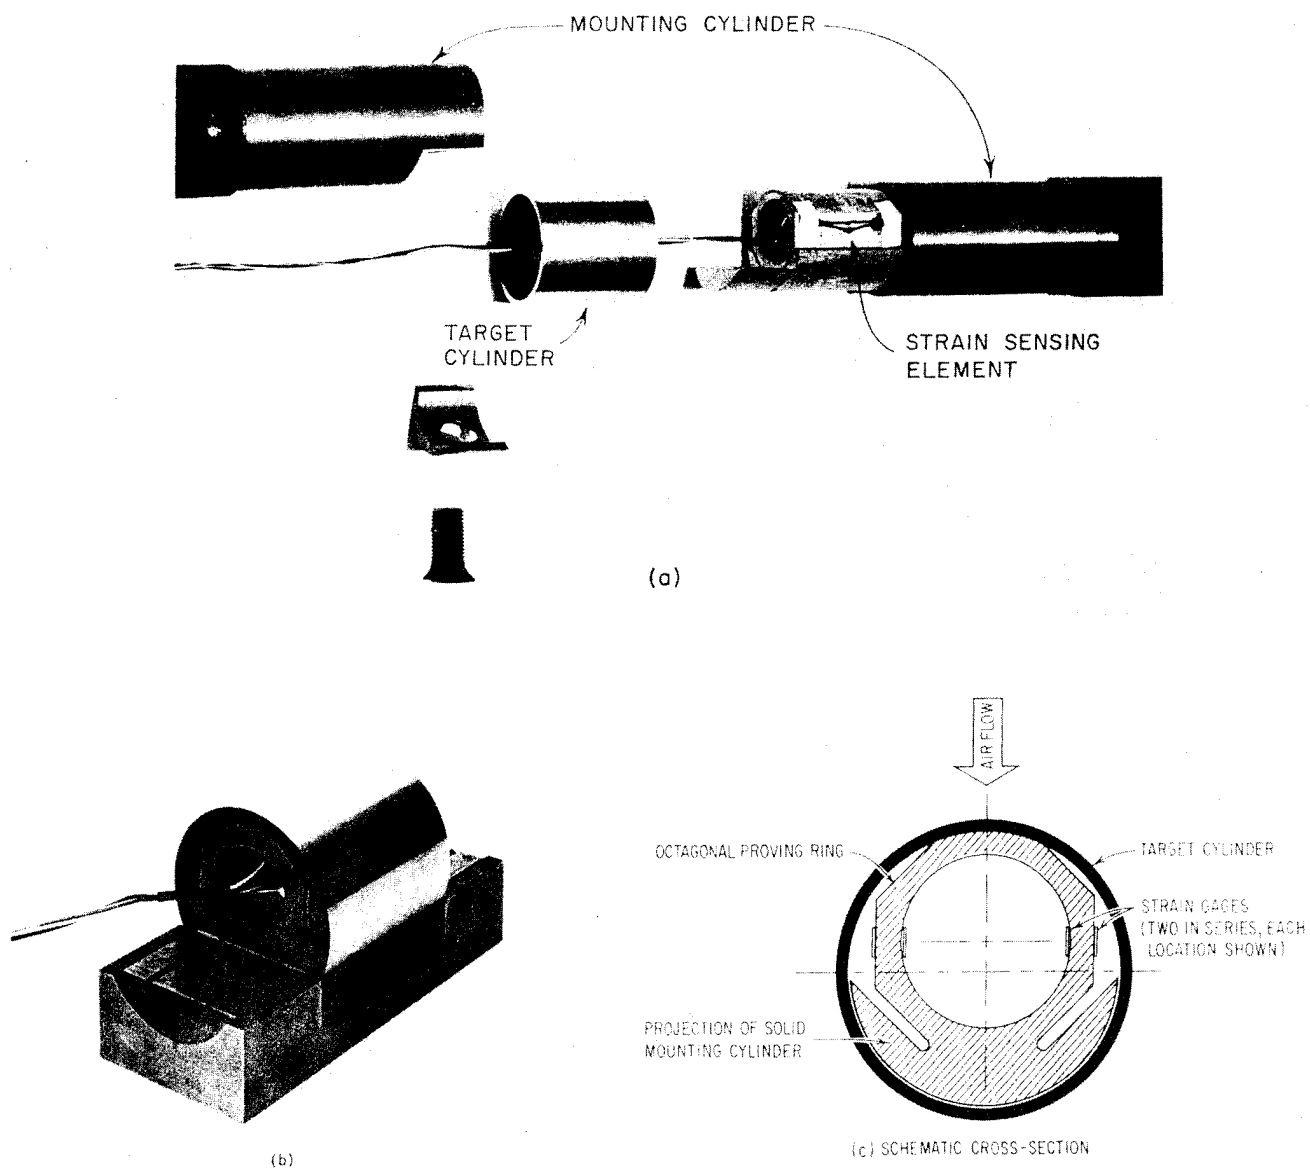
Total drag probe assembly. (a) exploded view - drag probe shown is for 50 psi overpressure region, (b) 500-psi probe shown on calibrating jig, (c) schematic cross-section.
